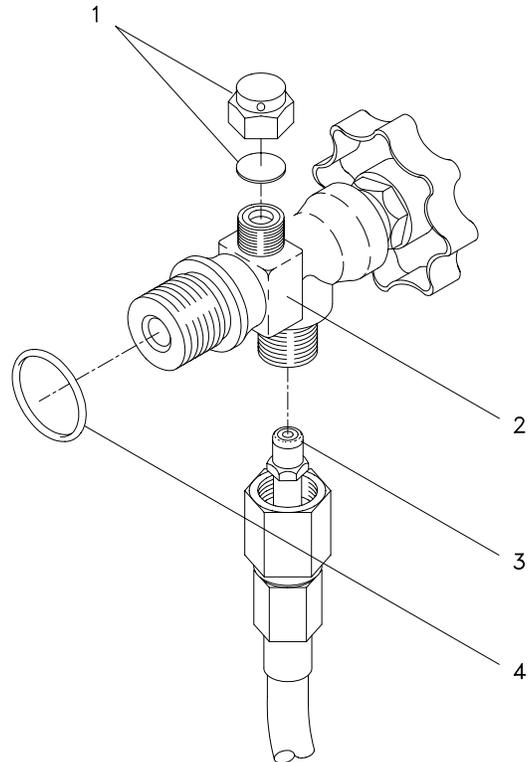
Flask Shutoff Valves (AHP-V505, AHP-V506, AHP-V507) and Softseat
